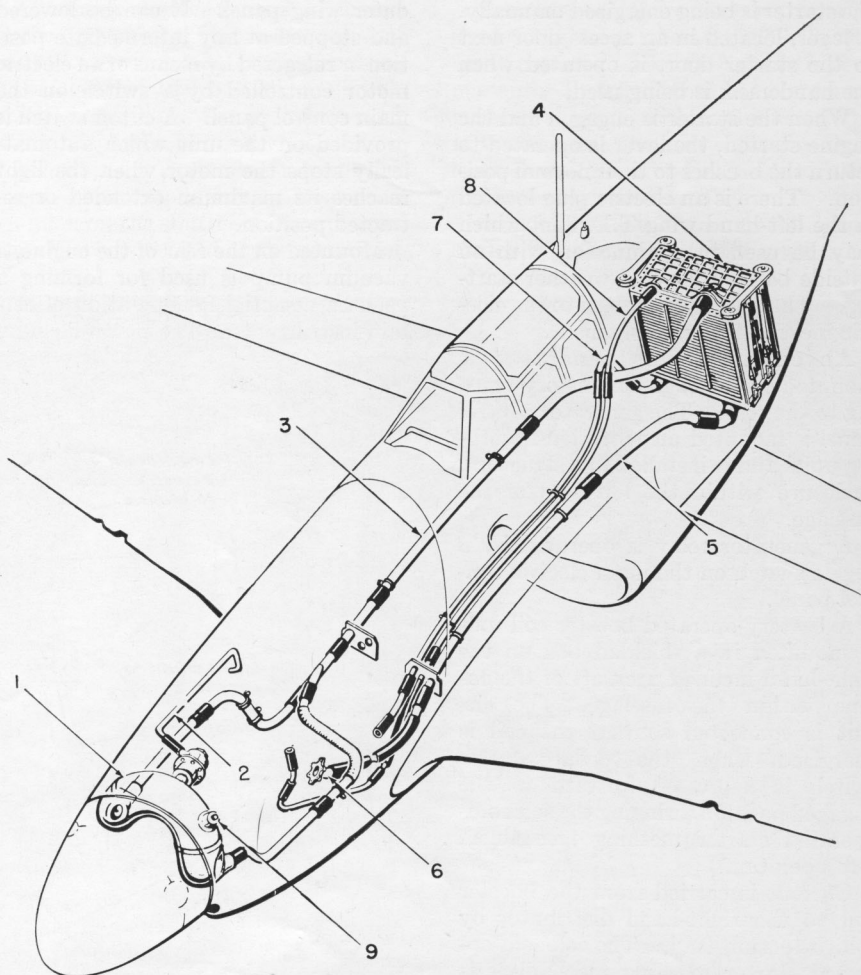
Engine coolant system. Here (1) is a coolant header tank vented at (2) which connects through pipe (3) to radiator (4) returning liquid by pipe (5) to pump (6). The supercharger cooler is supplied by (7) and (8). The system is filled at plug (9).
